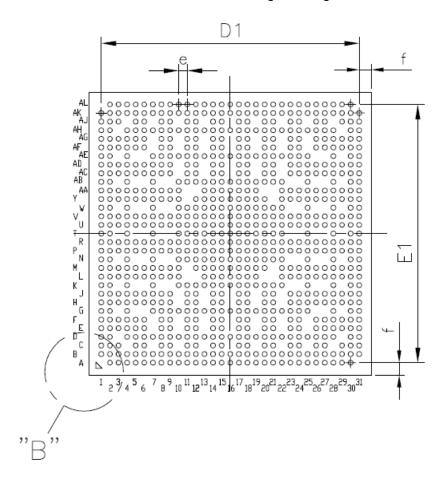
23 x 23 mm 6L 0.7mm 813 Ball FCBGA Package Drawing - Bottom View
